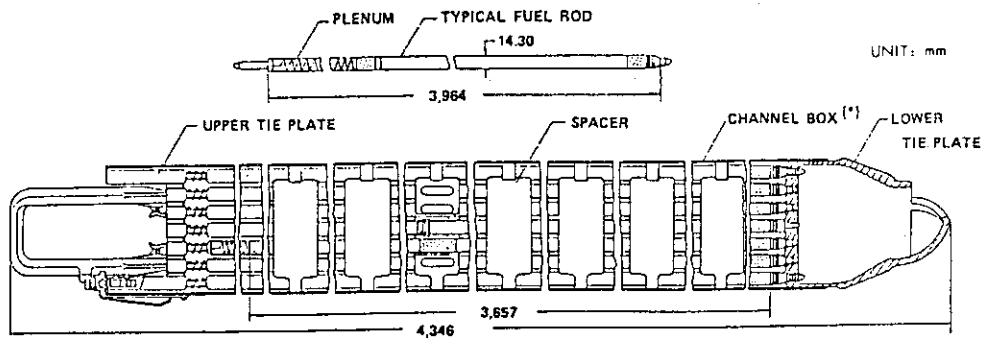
Fuel bundle drawing (JAPCO Tsuruga reload batch-2)
